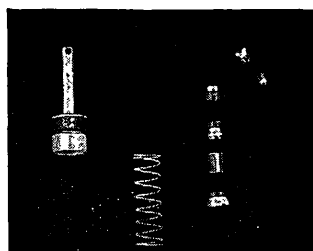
Assemble parts for pump circuit. Check leather for damage. Soak leather in oil before installing
